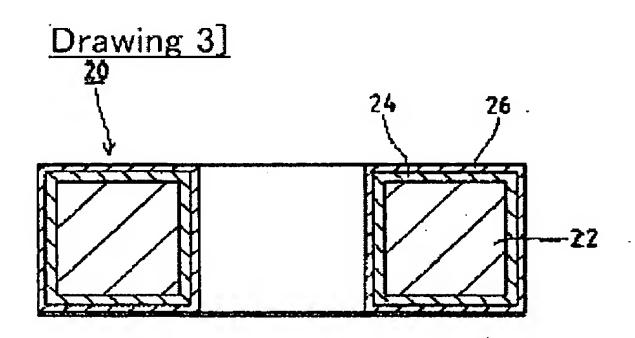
It is the sectional view showing the rare earth bond magnet concerning the 2nd example of this invention.
